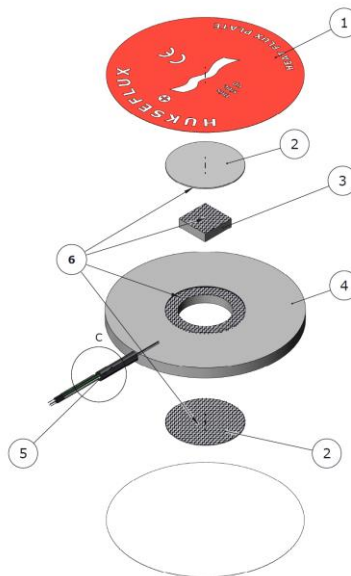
Exploded view of the HFP01 heat flux showing its physical make-up
